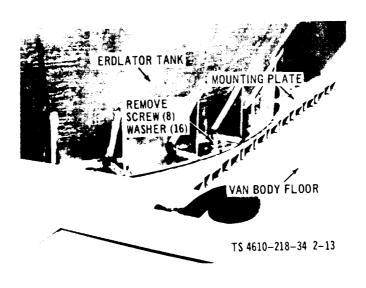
Erdlator Tank Bottom Mounting, Removal and Installation
